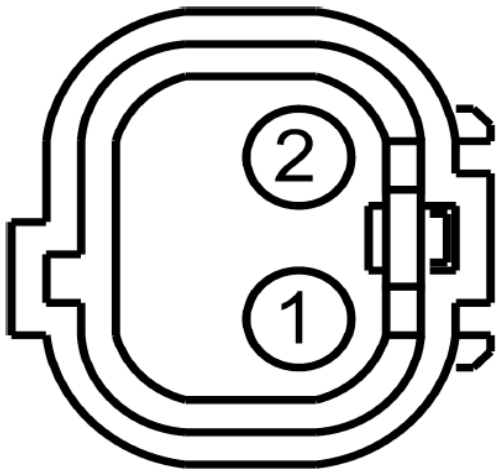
Heated Positive Crankcase Ventilation Valve Connector End View (C190)
